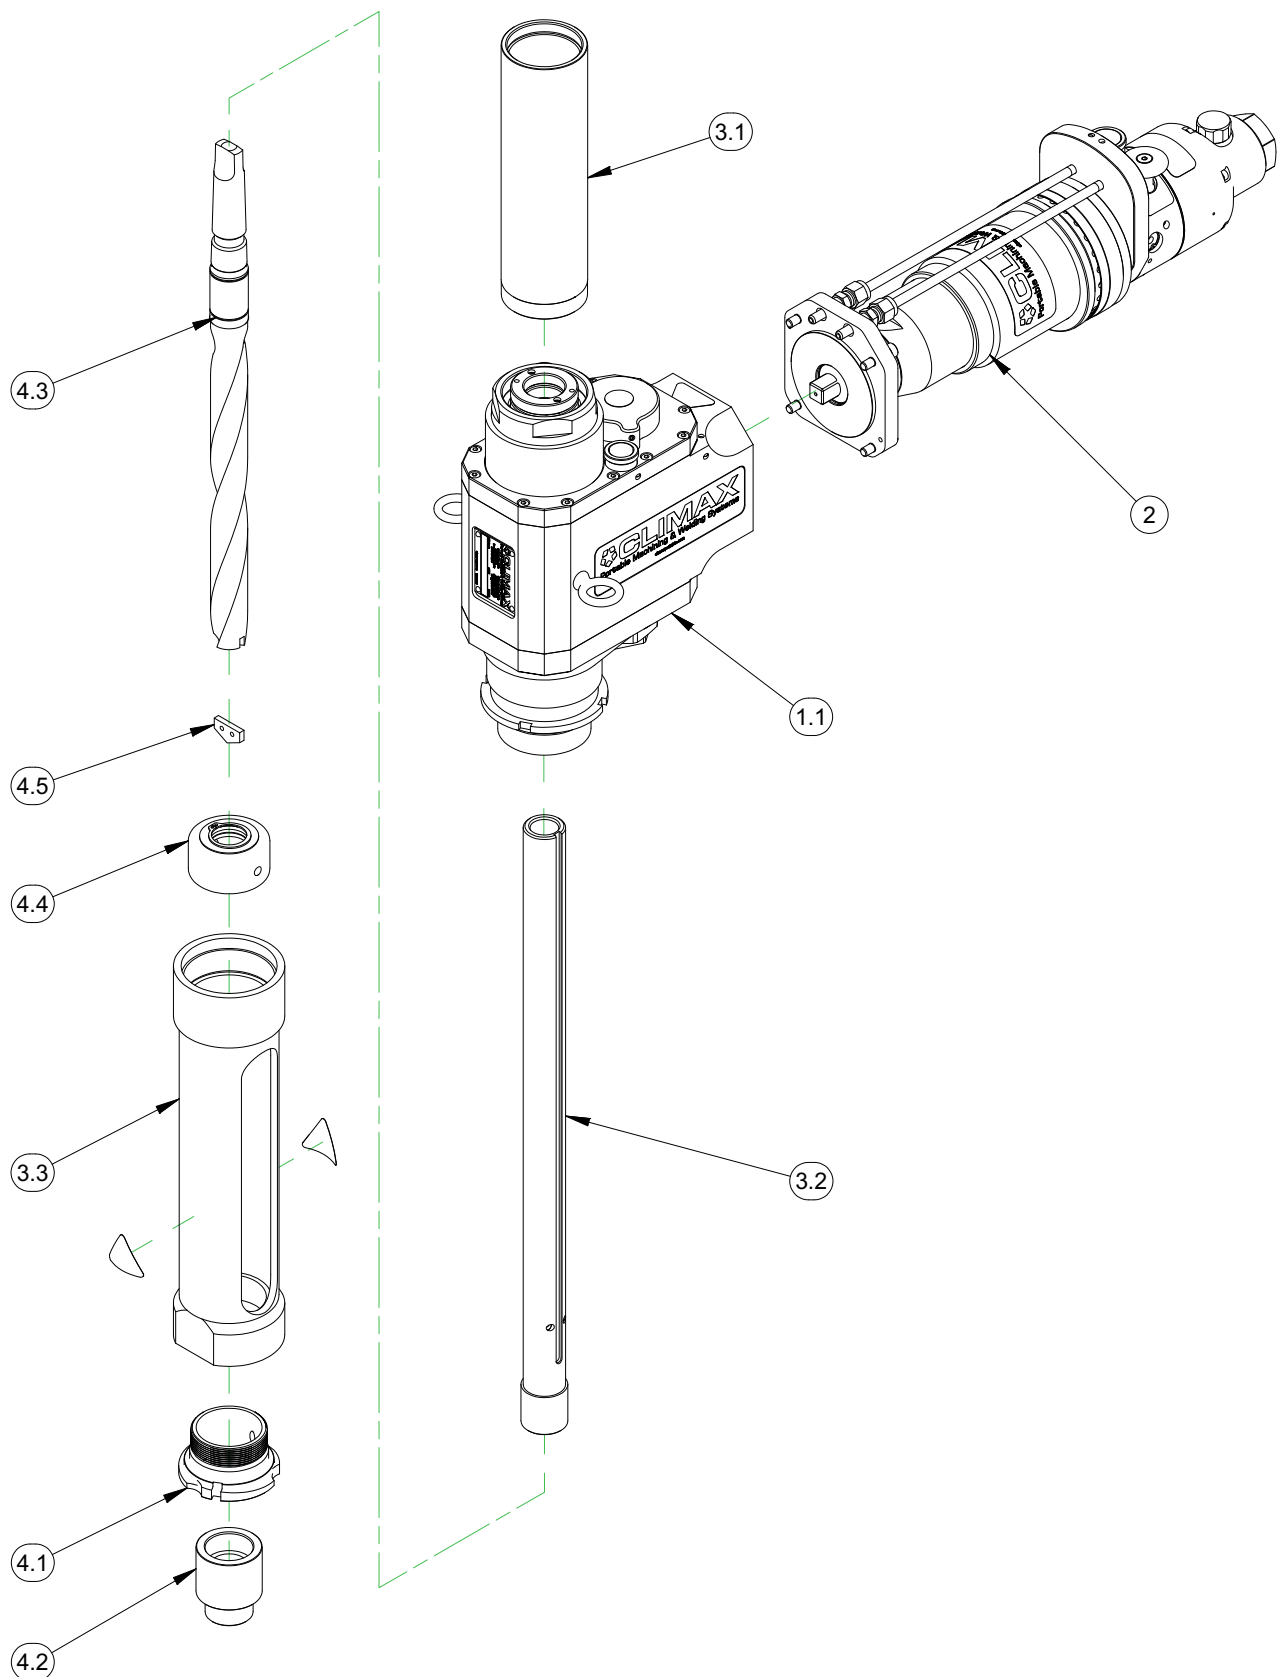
P/N 85825 PD3000 PORTABLE DRILL ASSEMBLY
